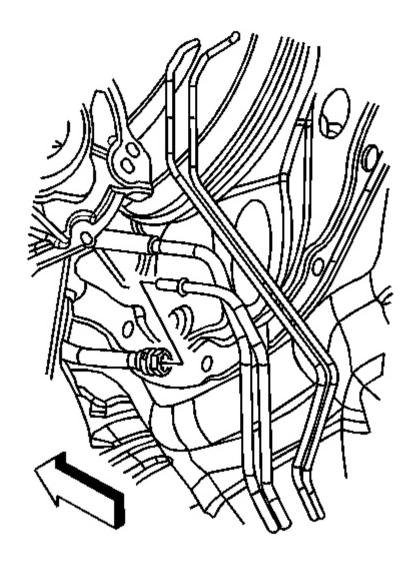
View Of Caps or Plugs From The Purge Pipe Courtesy of GENERAL MOTORS CORP.
